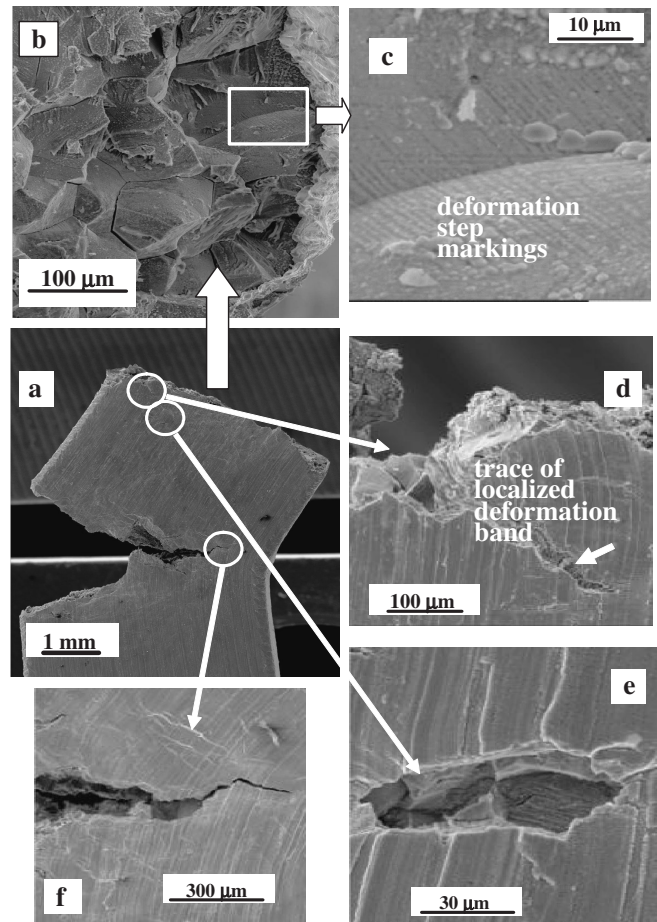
Fractographic appearances of the $6.2 \times 10^{20} n/cm^2$ specimen in water; (a) general surface view, (b) and (c) IG crack facets, and (d), (e) and (f) specimen surface cracks
